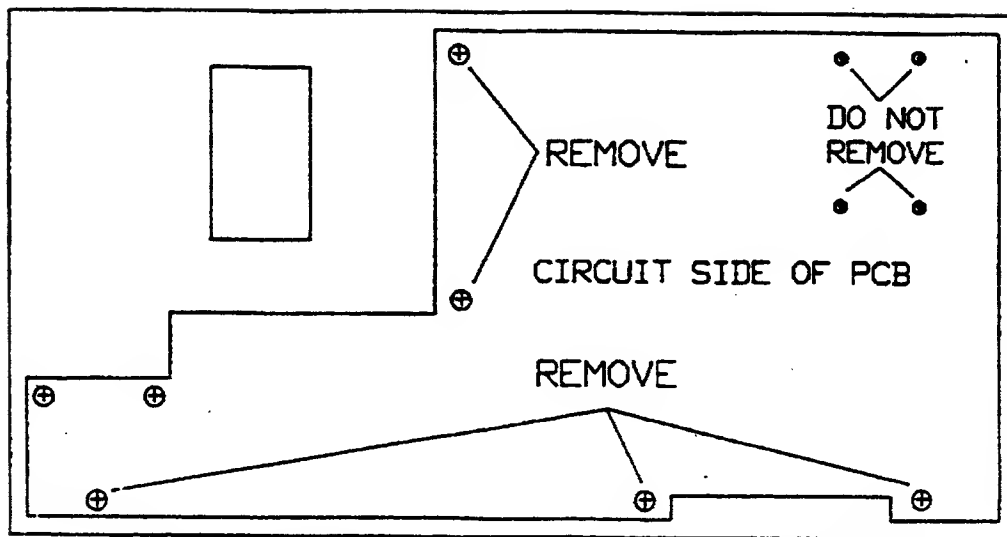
SCSI and HP-IB PCA Mounting Screws.
